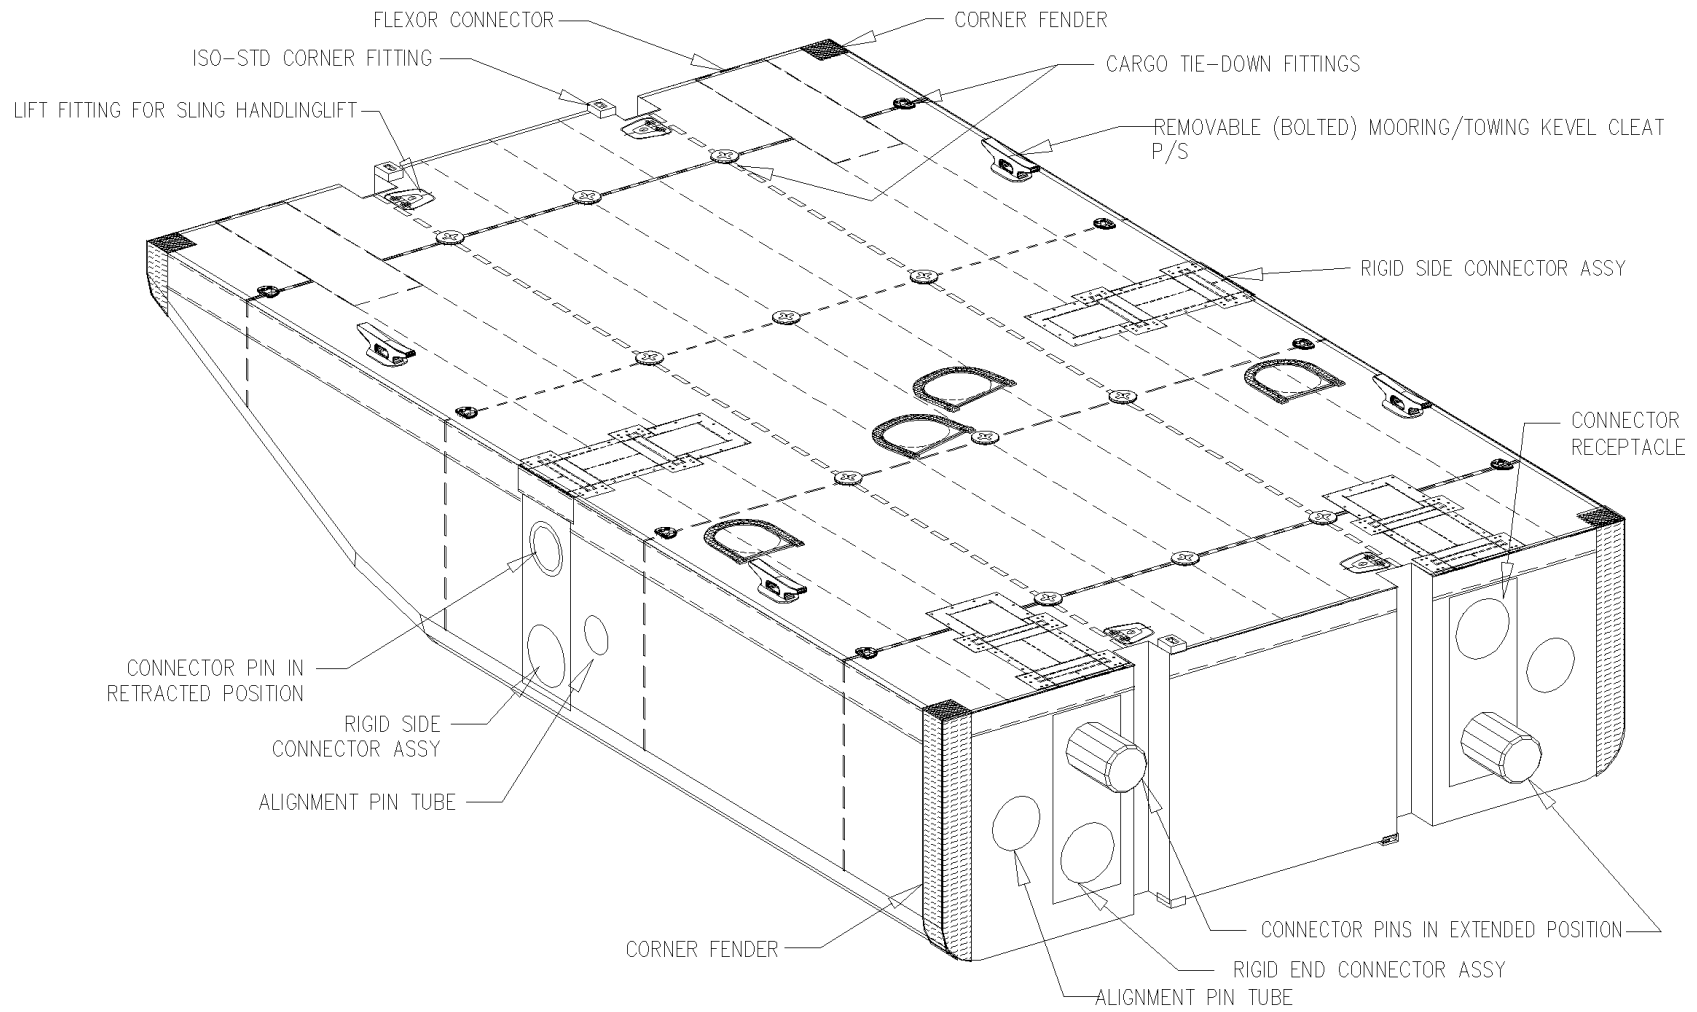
ACB Lighter Raked (Bow/Stern) Module Isometric View at Raked End
